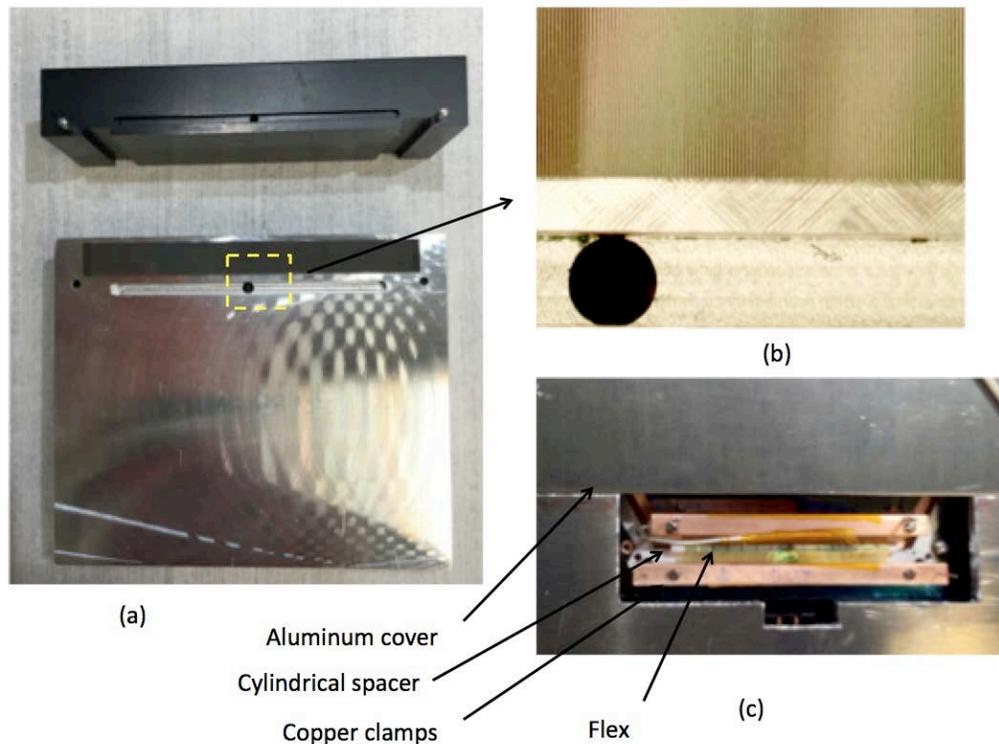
Image (a) shows the Delrin jig (up) and the aluminum jig (bottom). And image (b) shows a portion of aluminum jig around the silicon indicator. When gluing the flex, an aluminum cover is used to protect wiring chips and wire bonds, shown in image (c).
